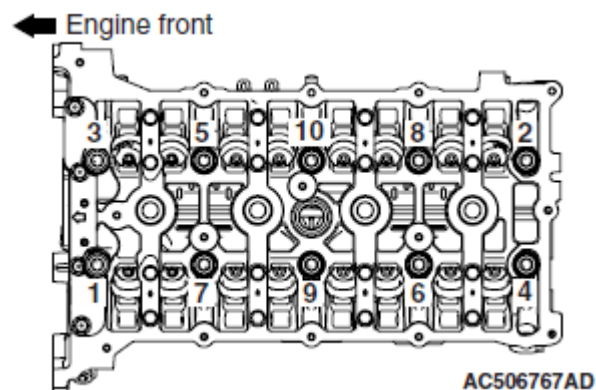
Identifying Cylinder Head Bolts Loosening Sequence
